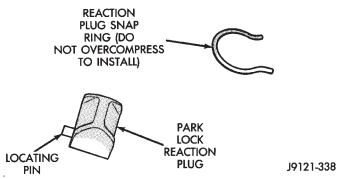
Reaction Plug Locating Pin And Snap-Ring
